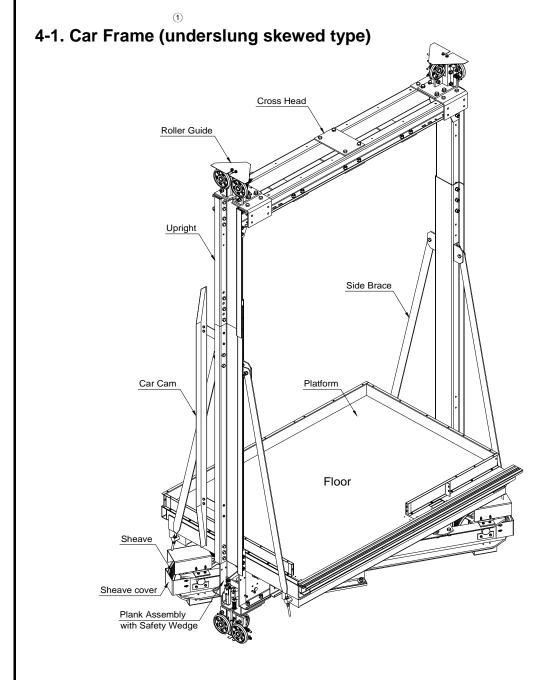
CAR FRAME ASSEMBLY (Underslung Skewed type)
